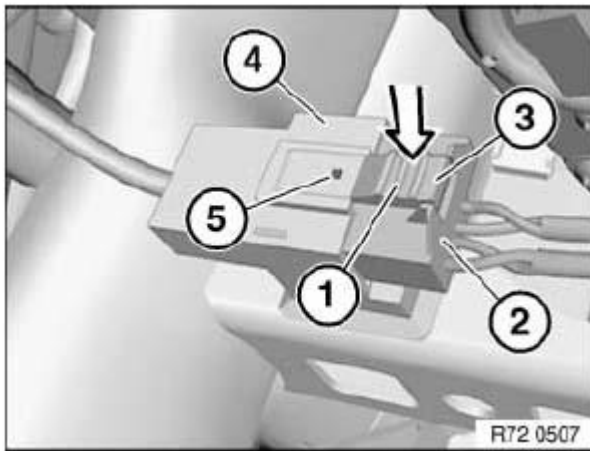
Pressing Locking/Unlocking Plate On Edge
